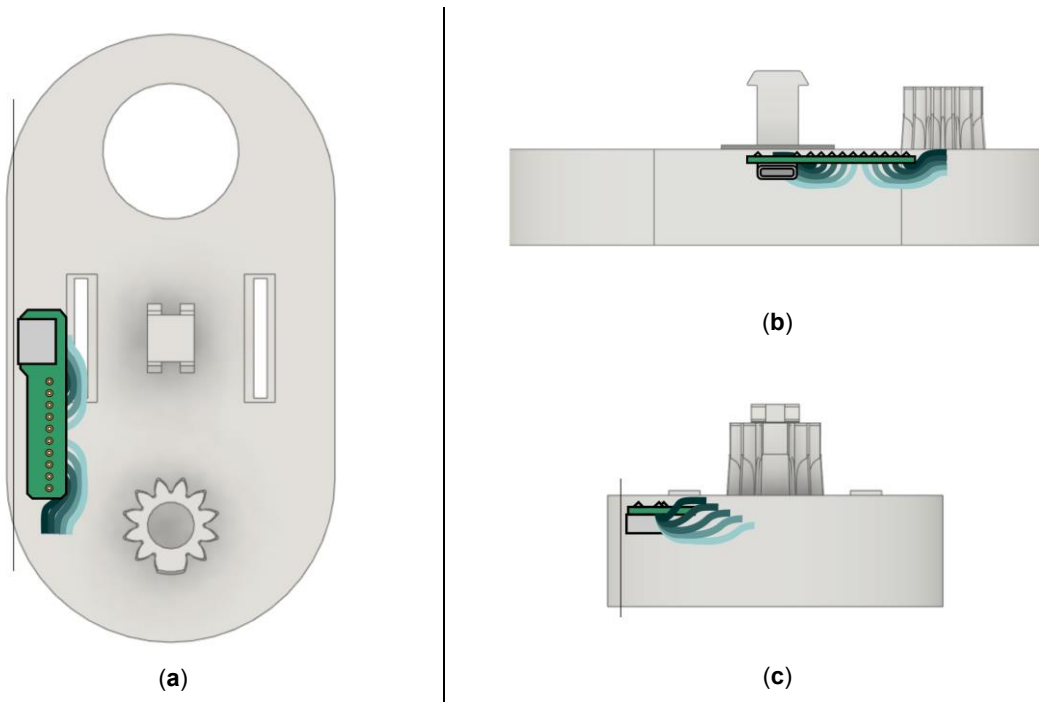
Illustration of the proposed custom-designed USB-C breakout board on the side of the resistance module: (a) top view; (b) side view; and (c) rear view.
